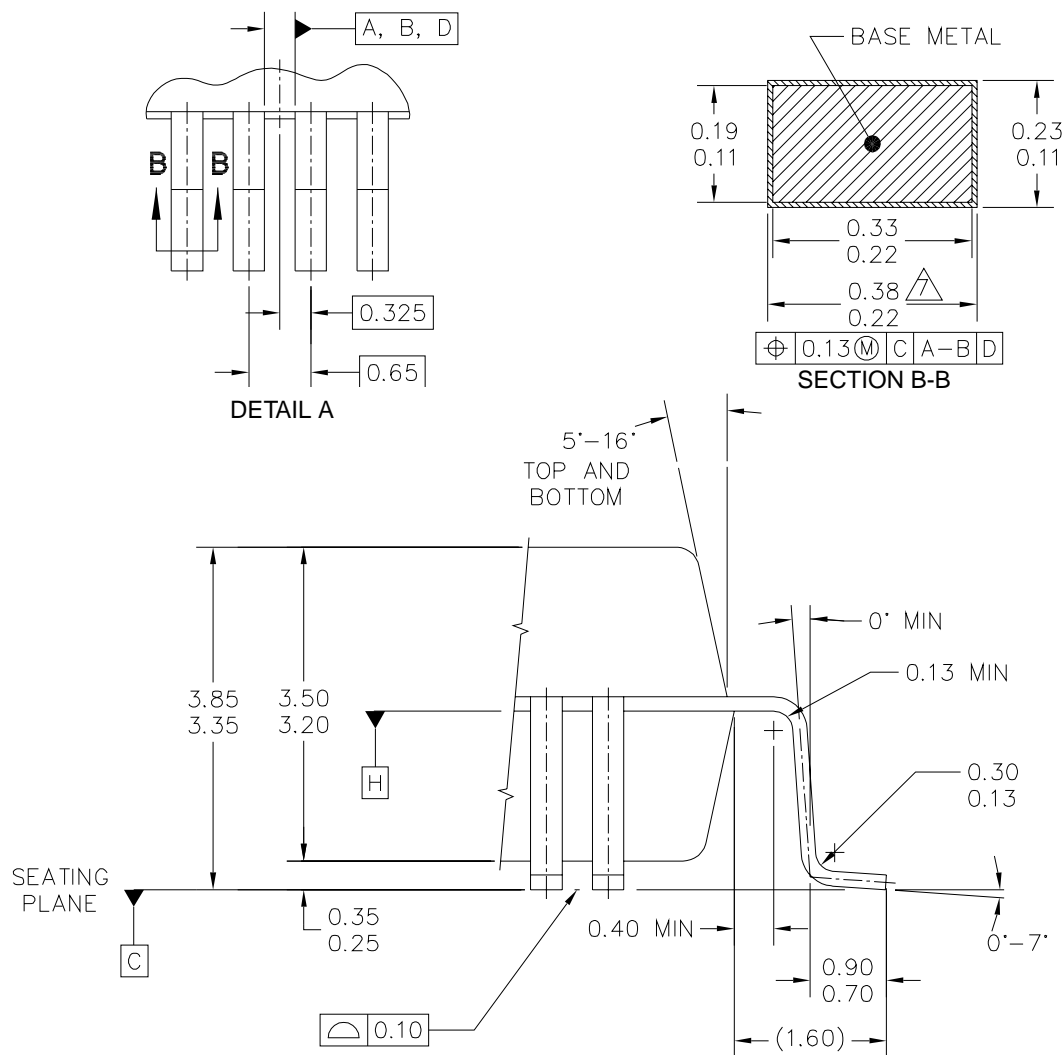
MCF5208CAB166 Package Dimensions (Sheet 1 of 2)
